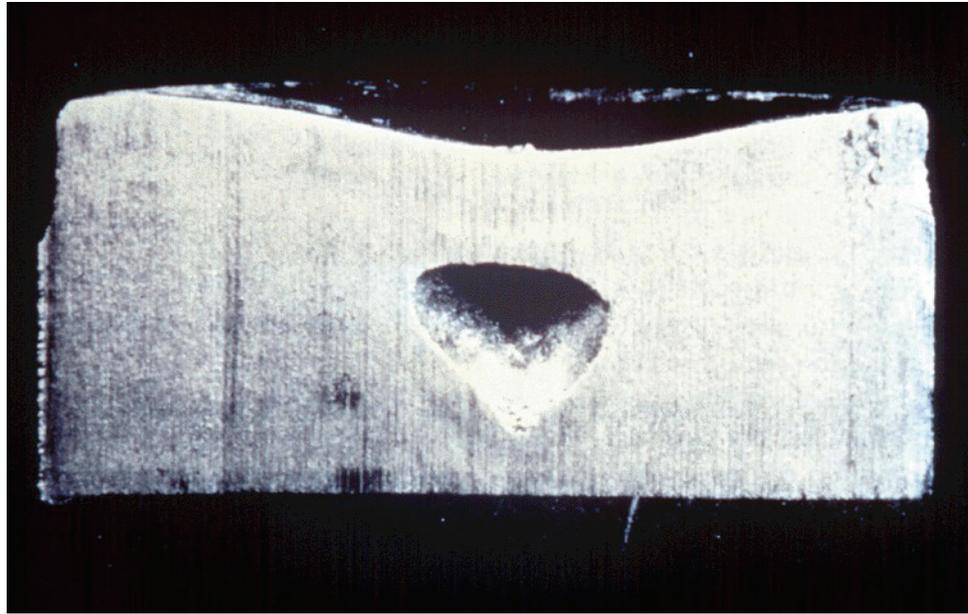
Shrinkage Cavity in Steel Billet
